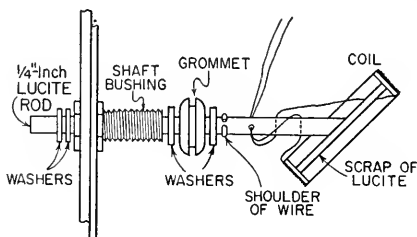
Details of the adjustable antenna coupling coil. Part of the coil has been cut away to show the support.
